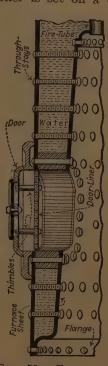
Furnace sheet flanged to close water-leg at bottom.
